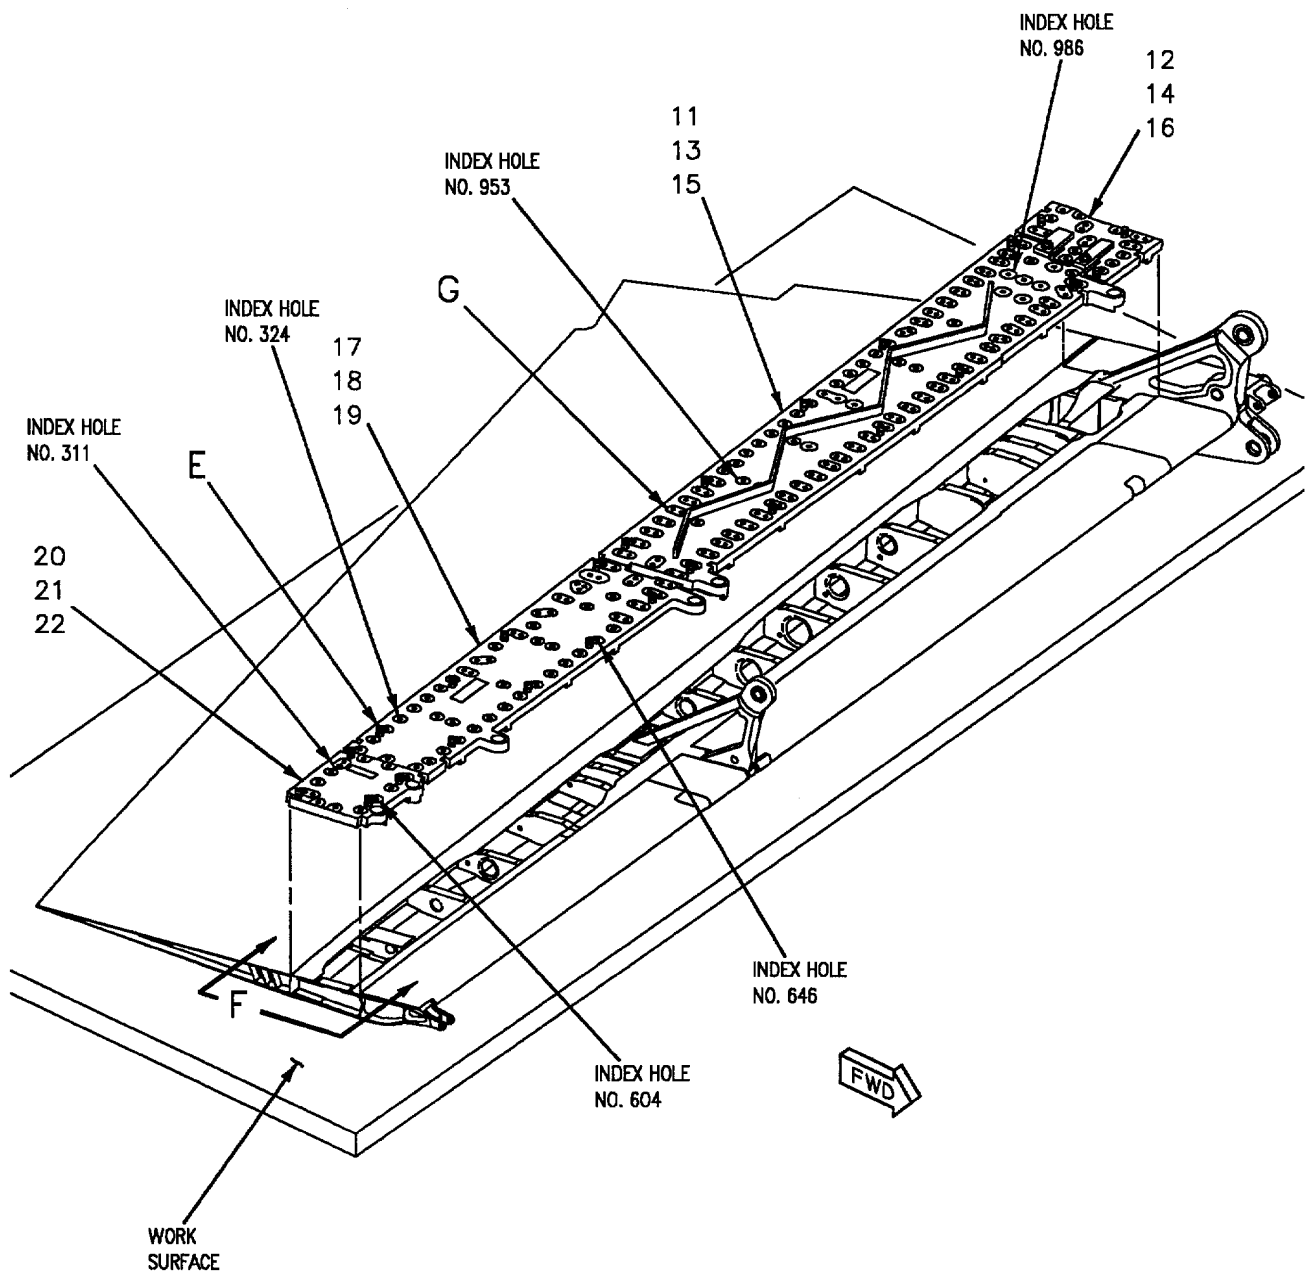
Installation of Plate Set for Drilling Substructure (Sheet 2)
